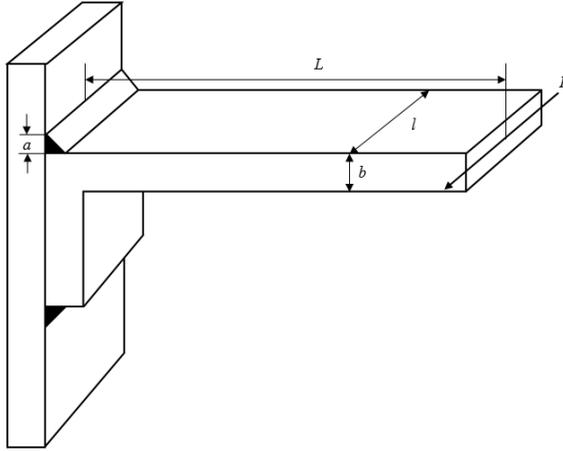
Simplified welding part sketch  $\alpha = 45^\circ$ .
